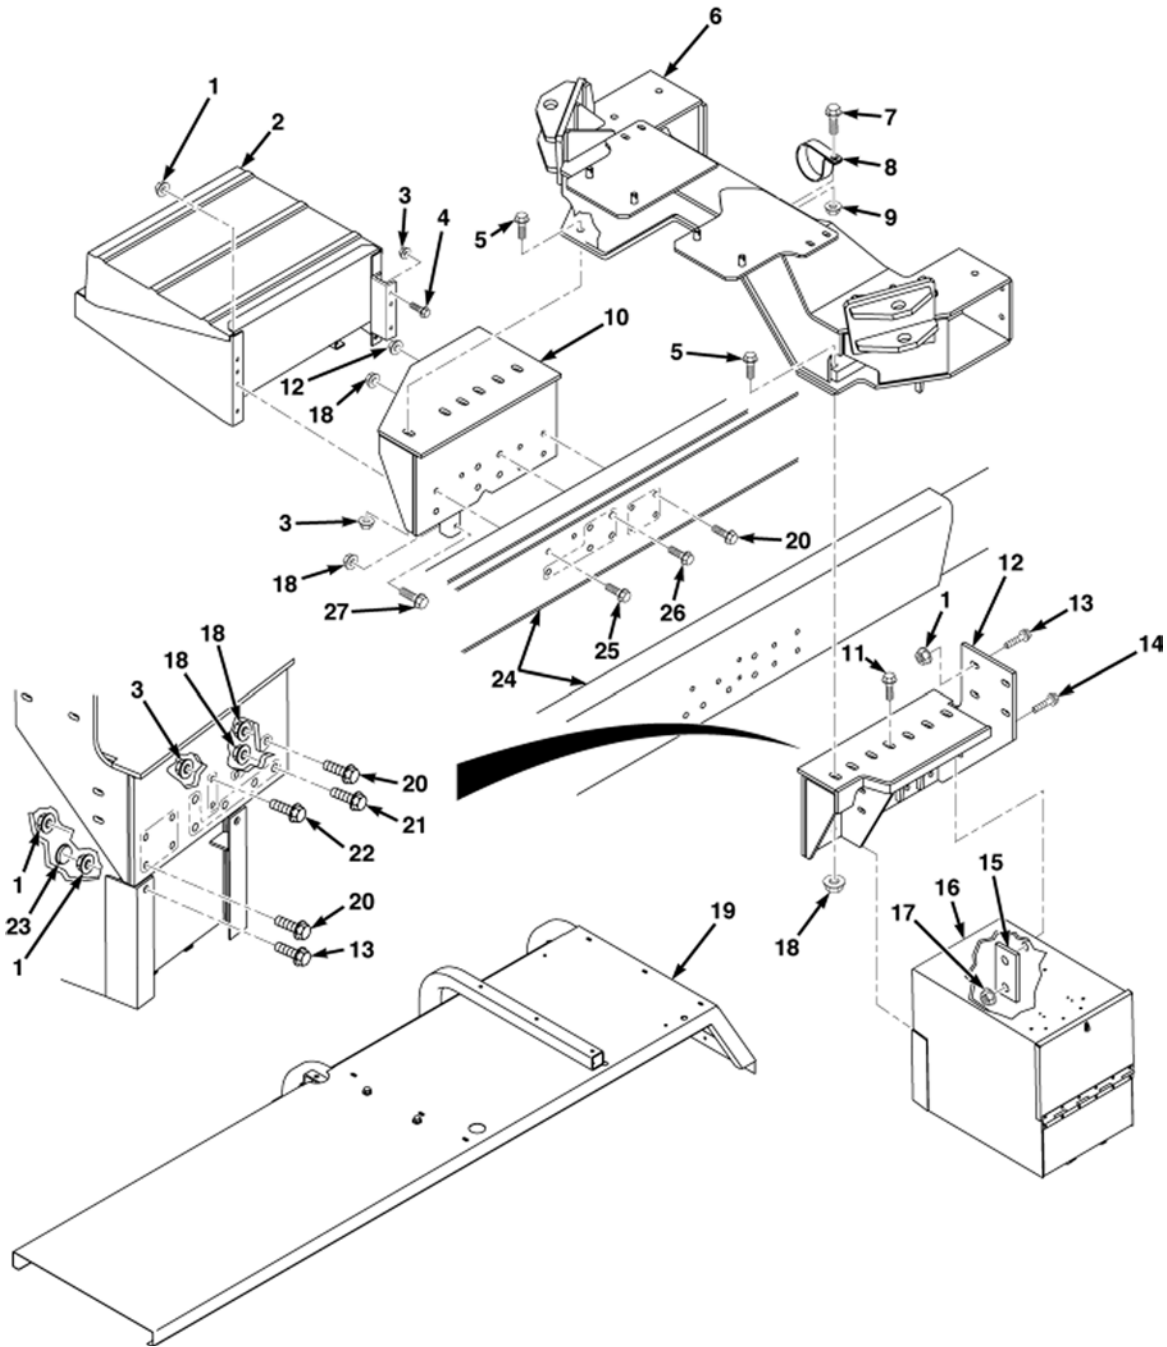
FRONT CONTAINER SUPPORT (SHEET 1 OF 2)
